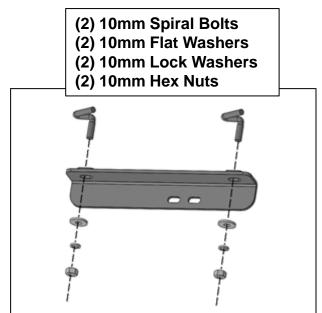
Insert (2) 10mm Spiral Bolts into the outer center location
